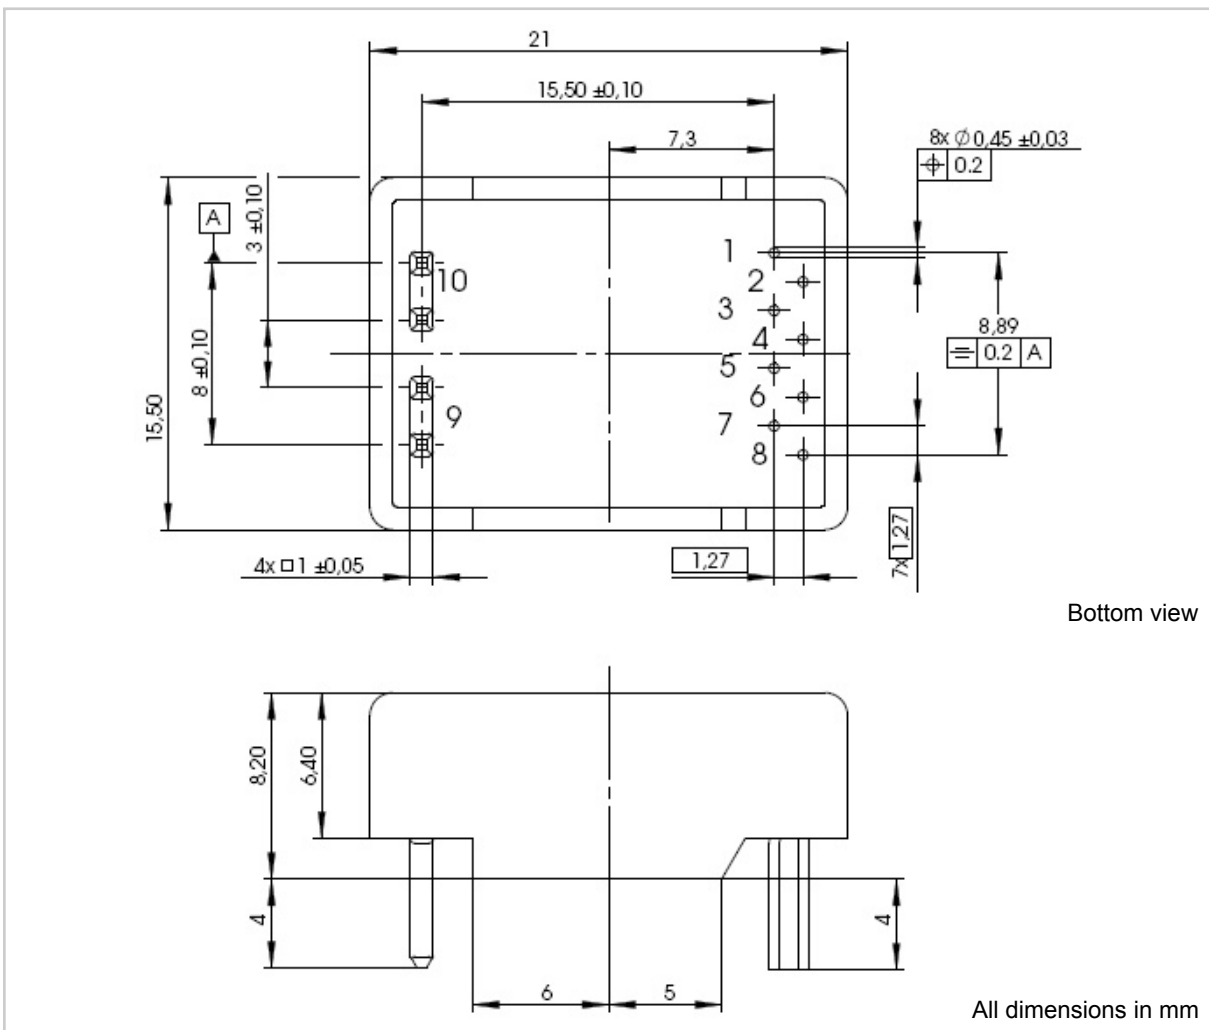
Package outline of THT-housing (small size). Tolerance  $\pm 0.2\text{ mm}$  unless otherwise specified.
